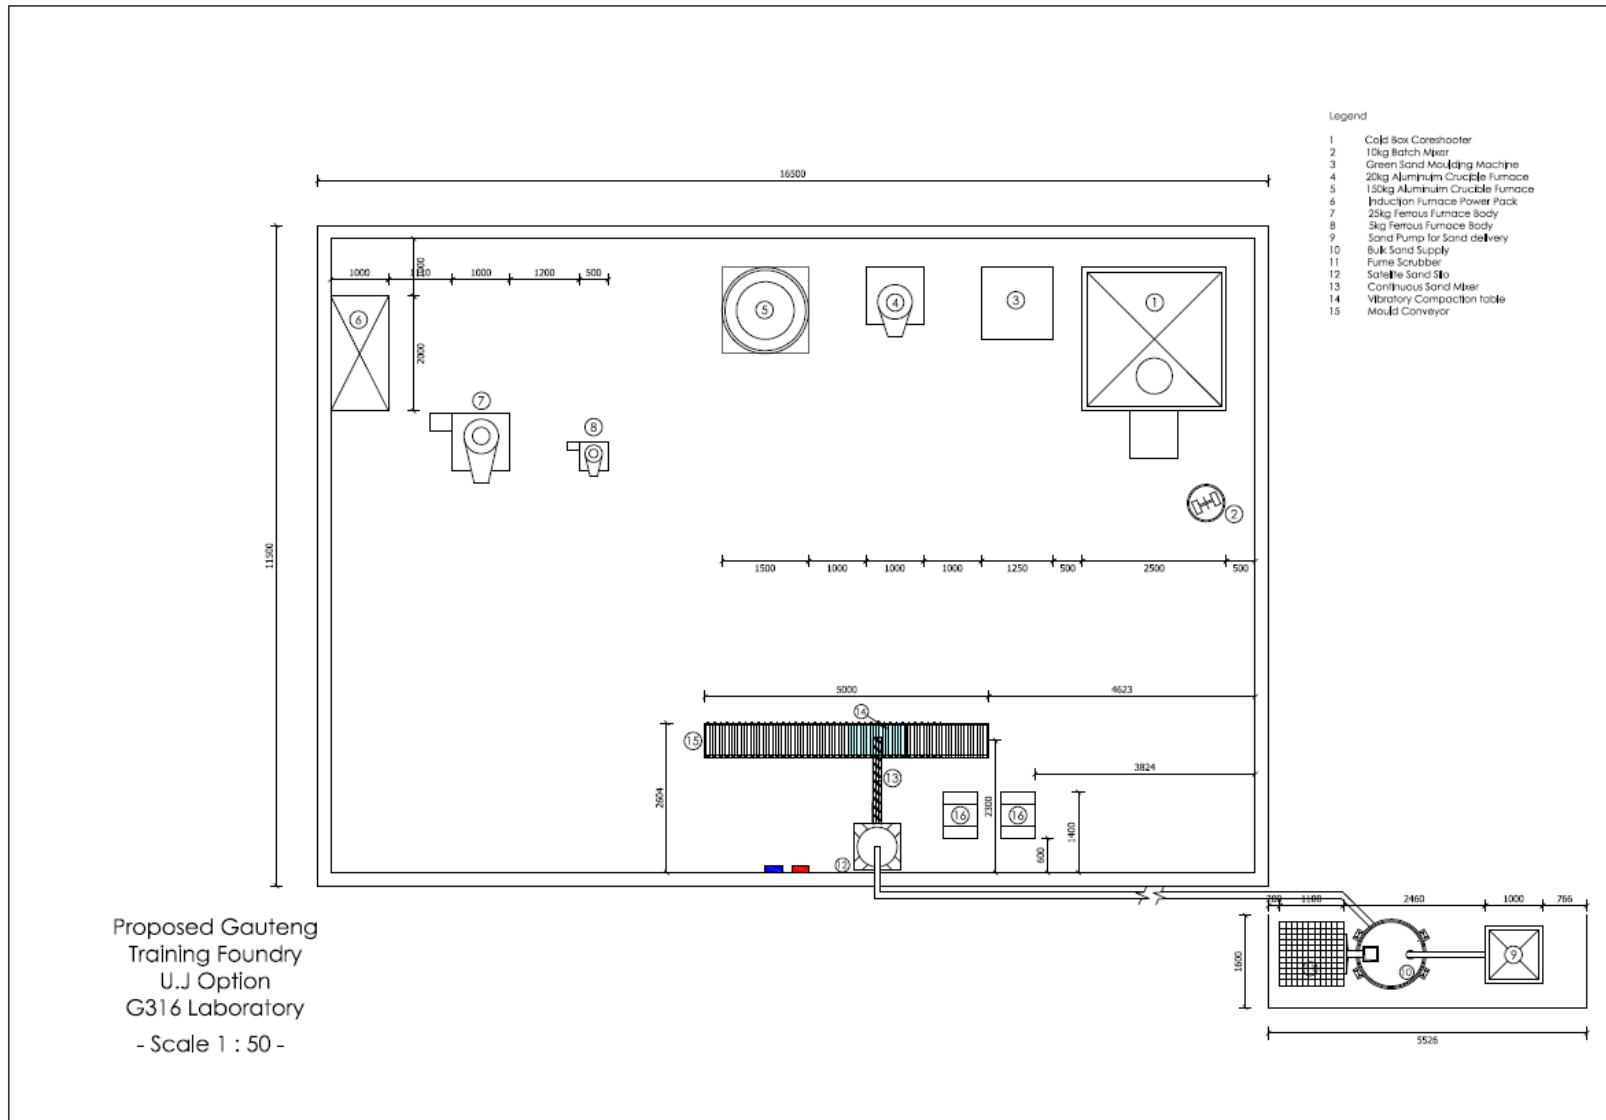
Concept layout for proposed training foundry at UJ – John Orr Building, Room G316.
